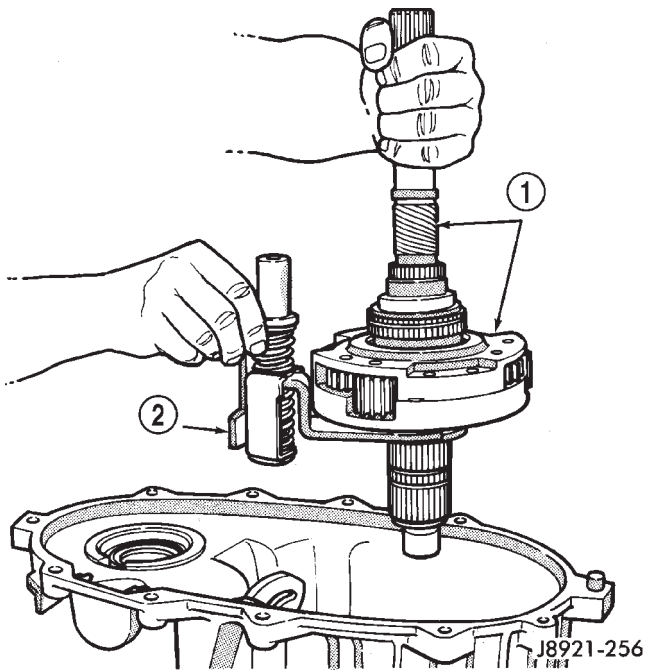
Assembled Mainshaft And Mode Fork Installation
